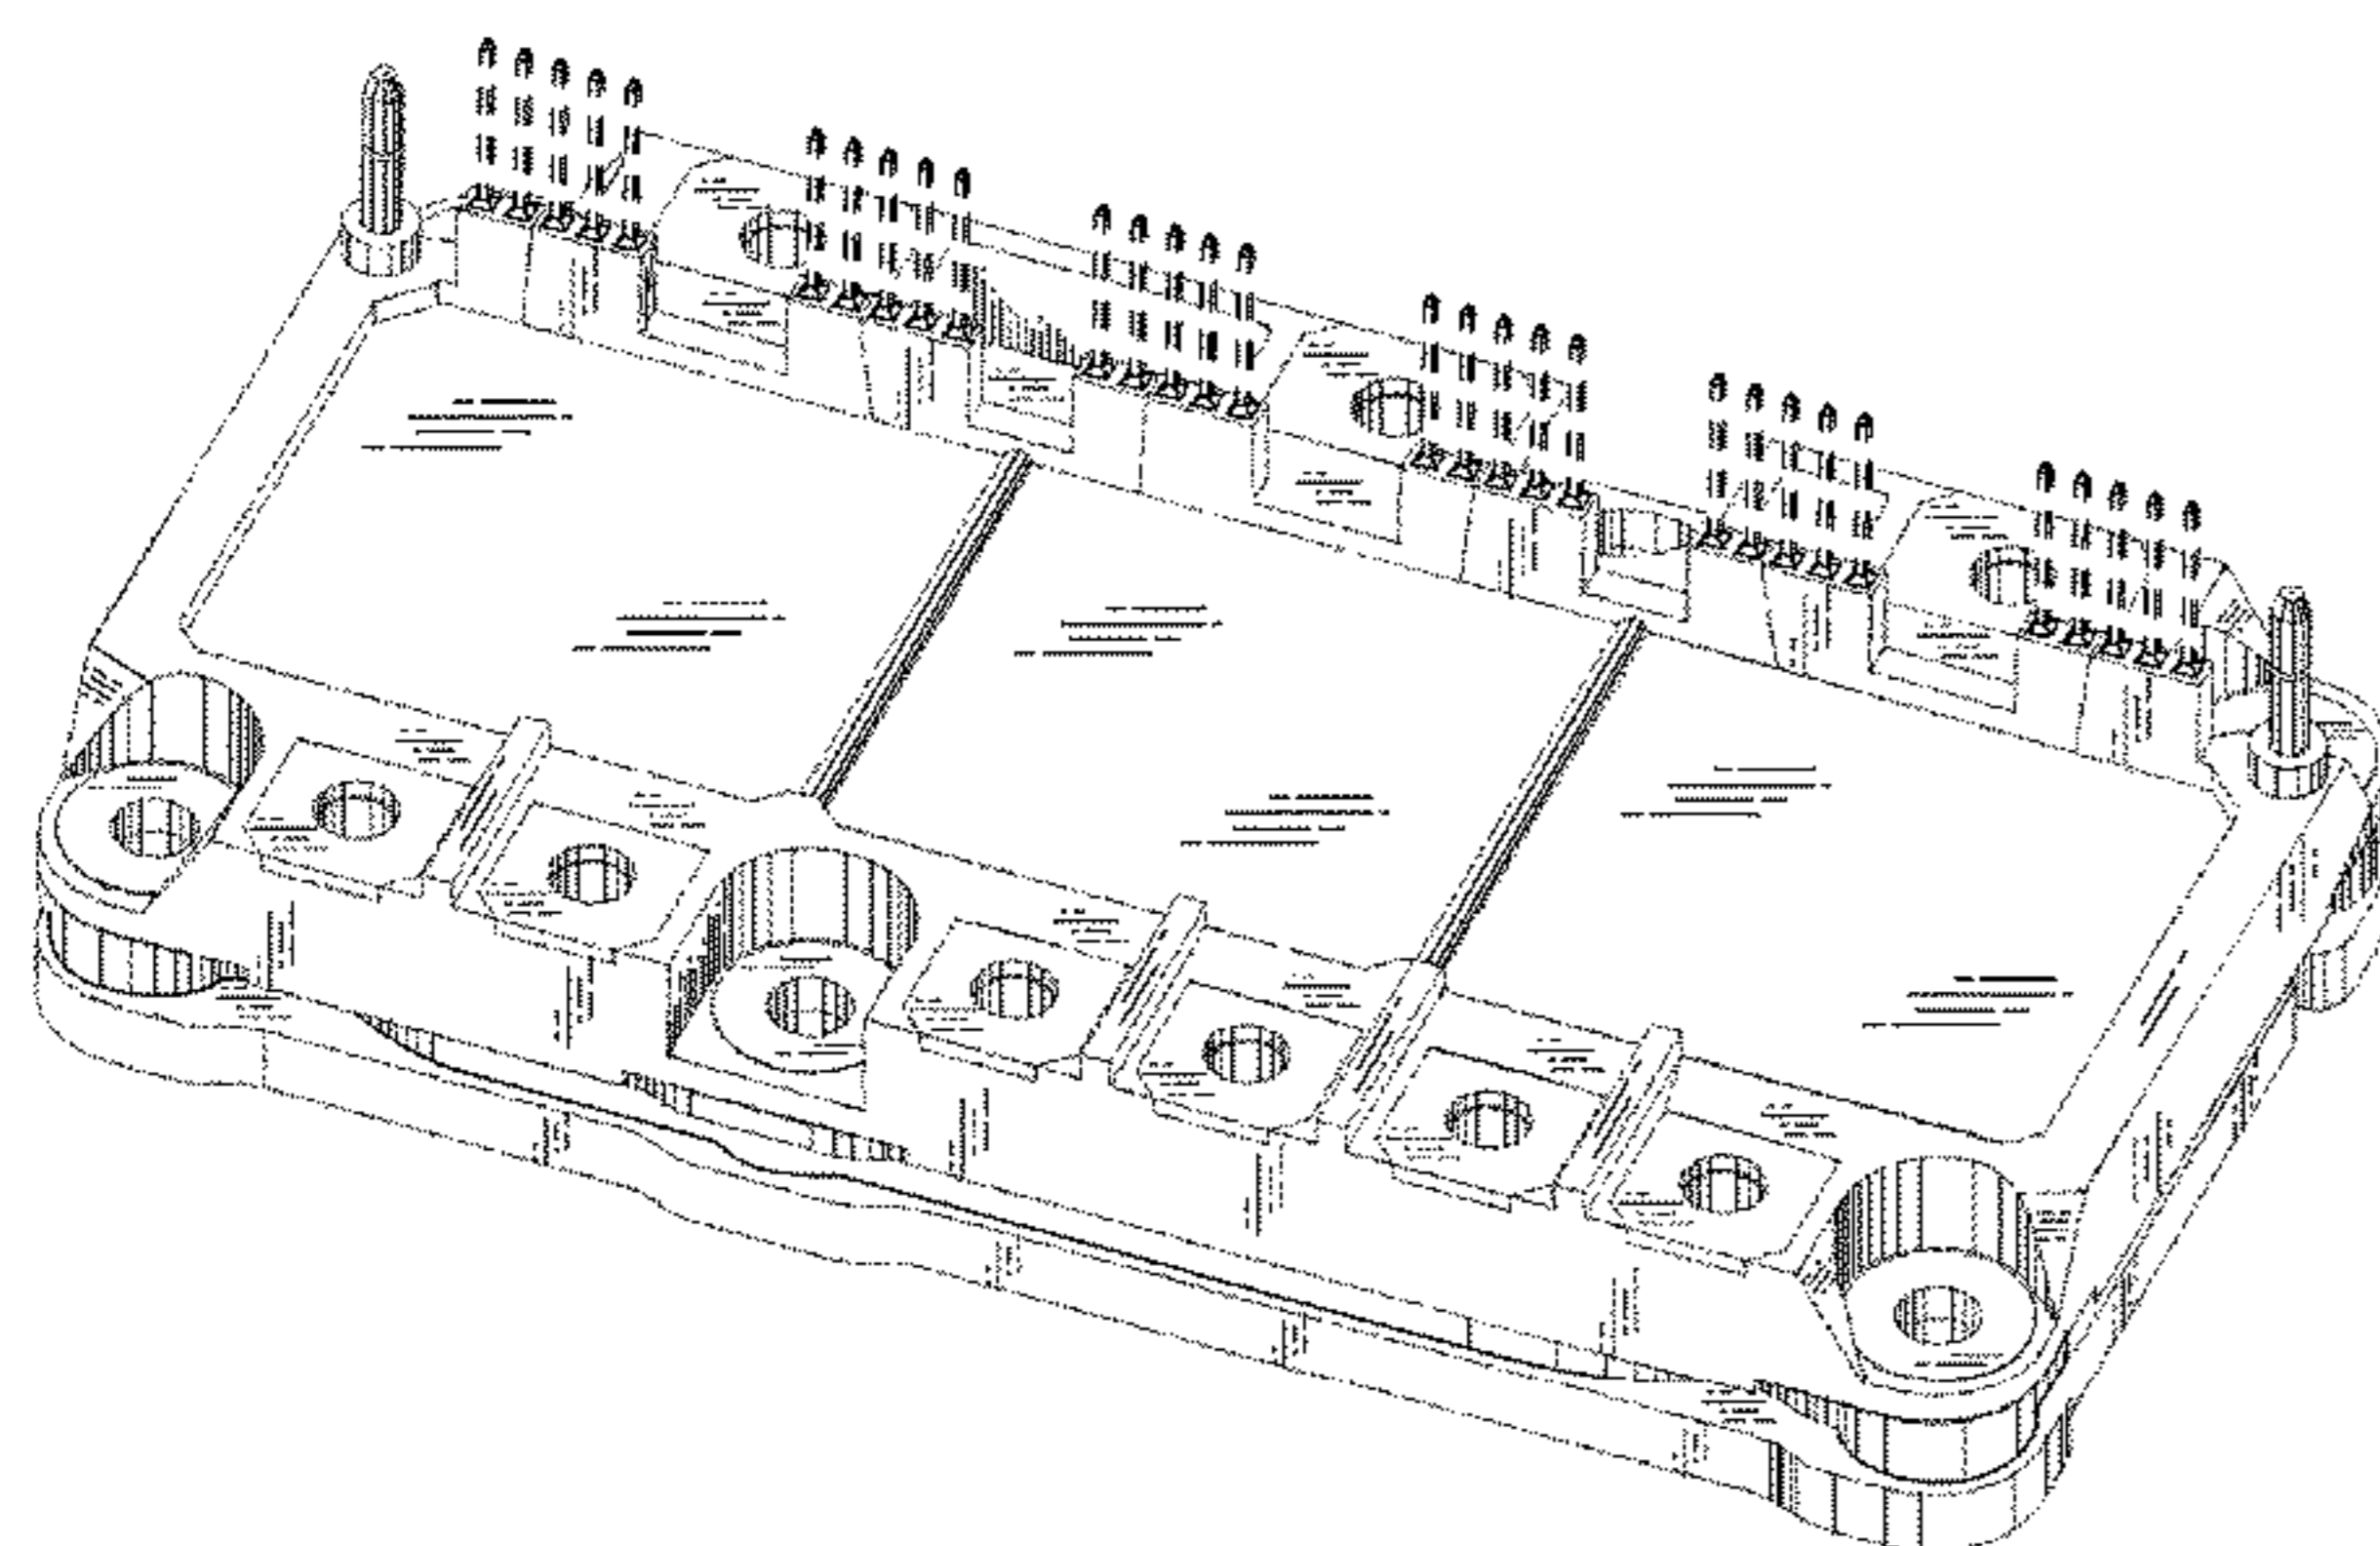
is a rear, bottom, and right side perspective view of the semiconductor module of FIG. 1;
